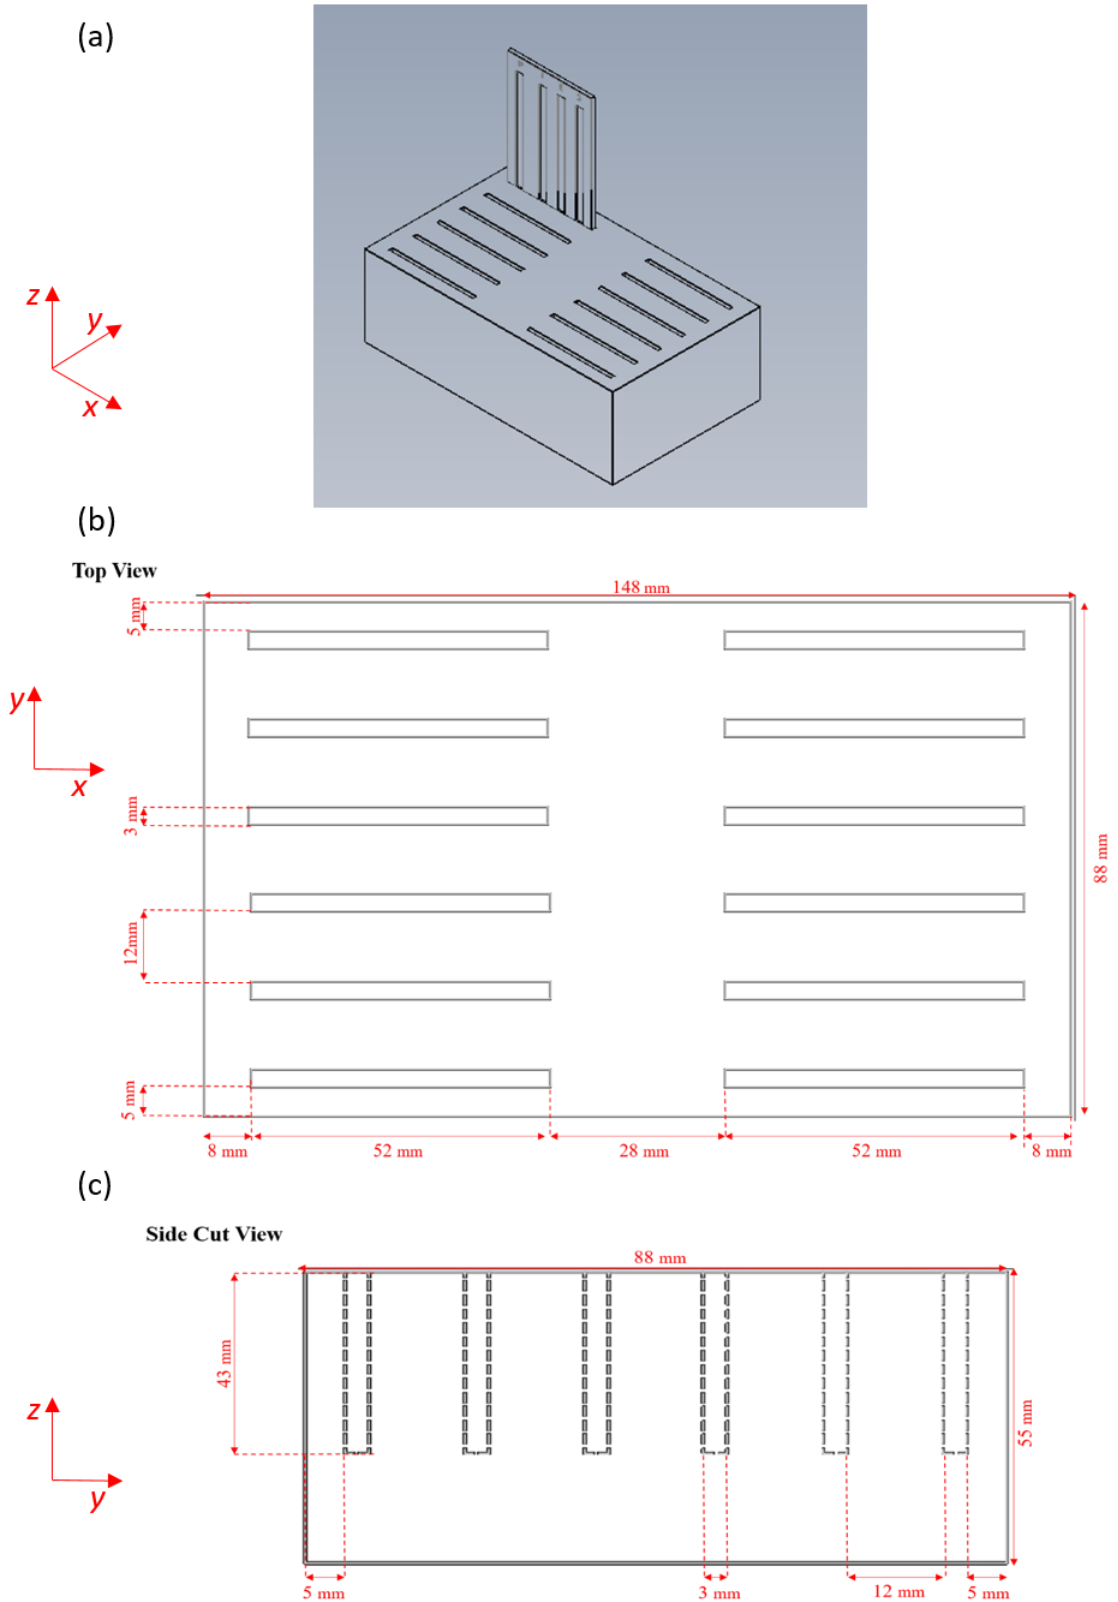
Design figure of the custom heat block manufactured to heat the Paper Device diagnostic cassette. (a) 3D design rendered on SOLIDWORKS, the design depicts a diagnostic cassette placed in the heat block. (b) Top view of the heat block design with dimensions. (c) Side cut view of the heat block design with dimensions.
